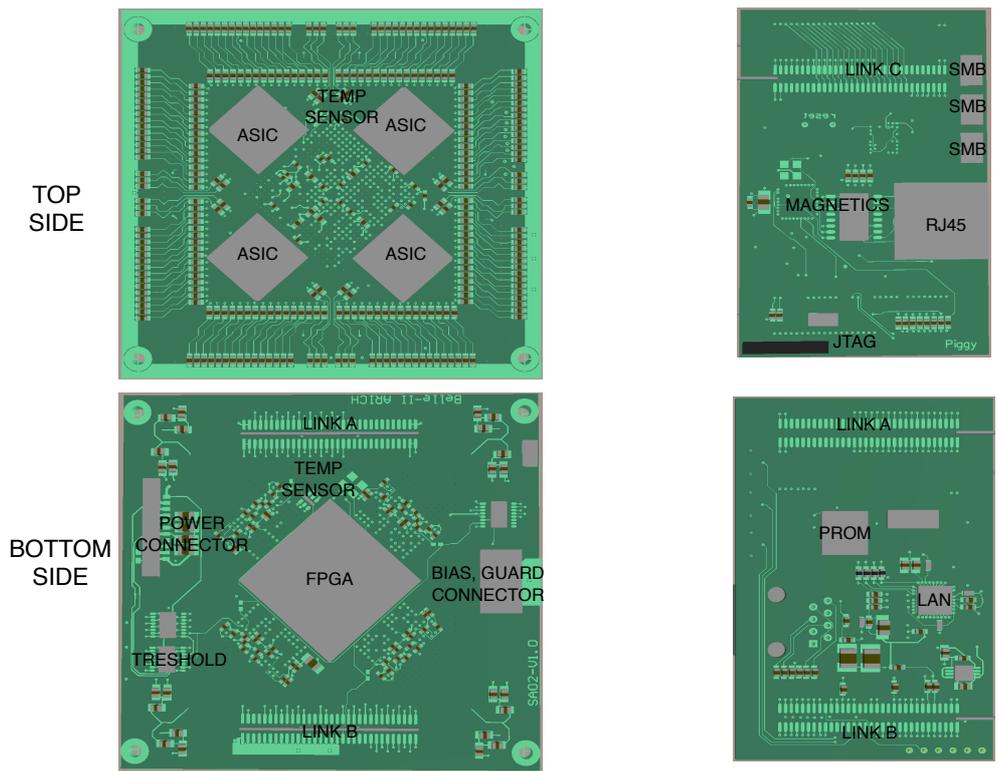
SA02 (left) and Piggyback (right) boards geometrical layouts.
